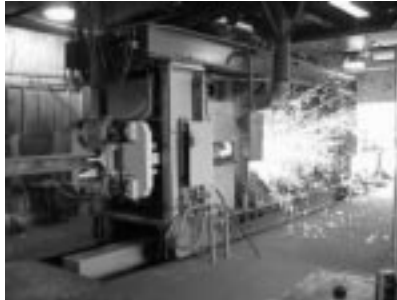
Welding by stationary flash butt welding plant
